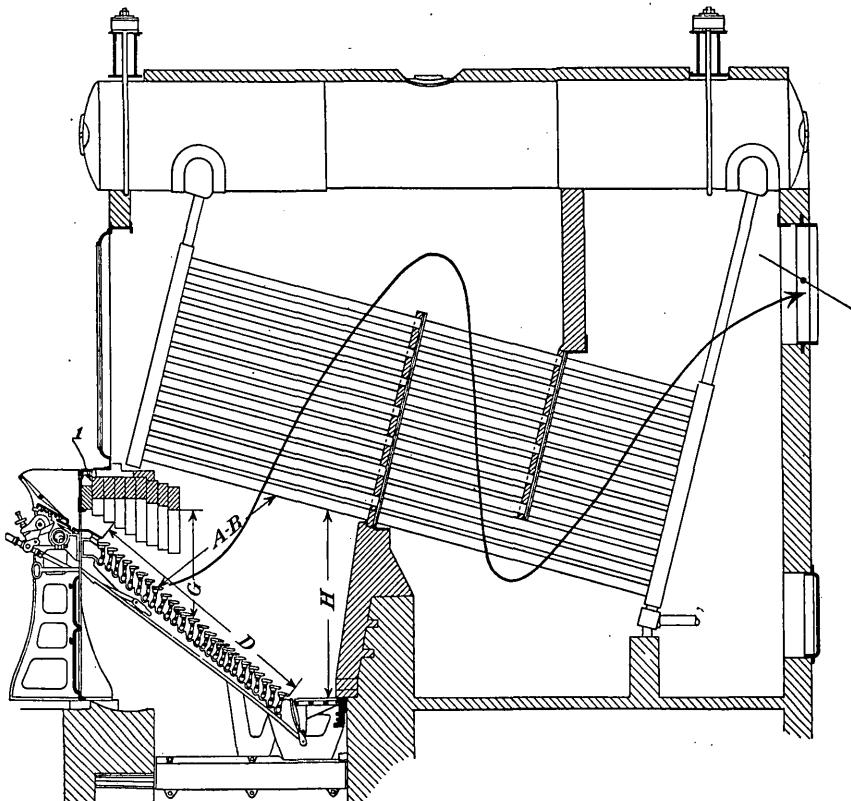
Front-feed stoker and Babcock & Wilcox boiler, usual setting. 1, Air space; steam jets enter furnace at this point.
